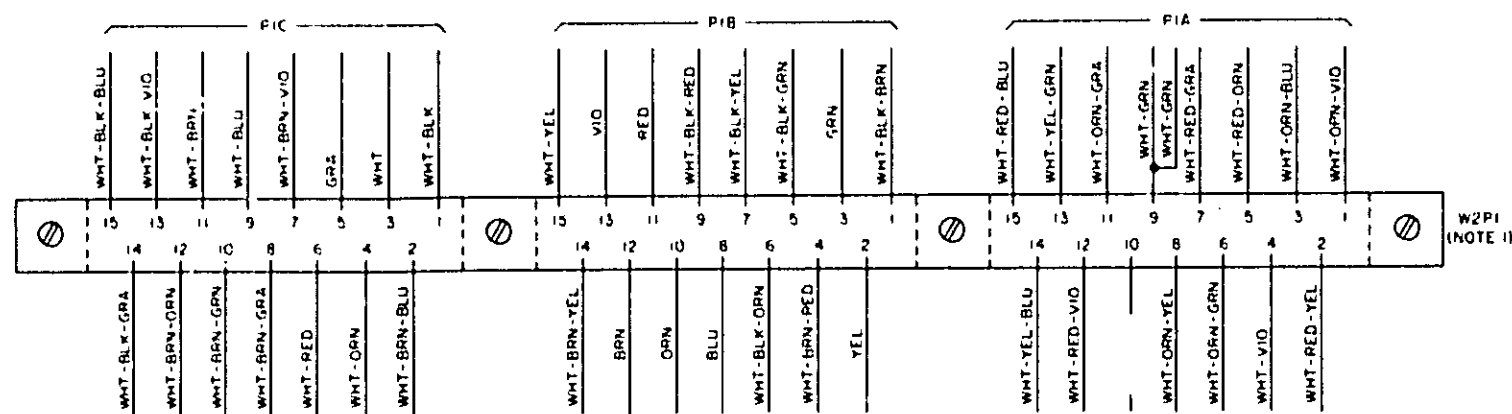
Option 002, Remote Programming Cable Assembly and Rear Panel Connector Assembly
